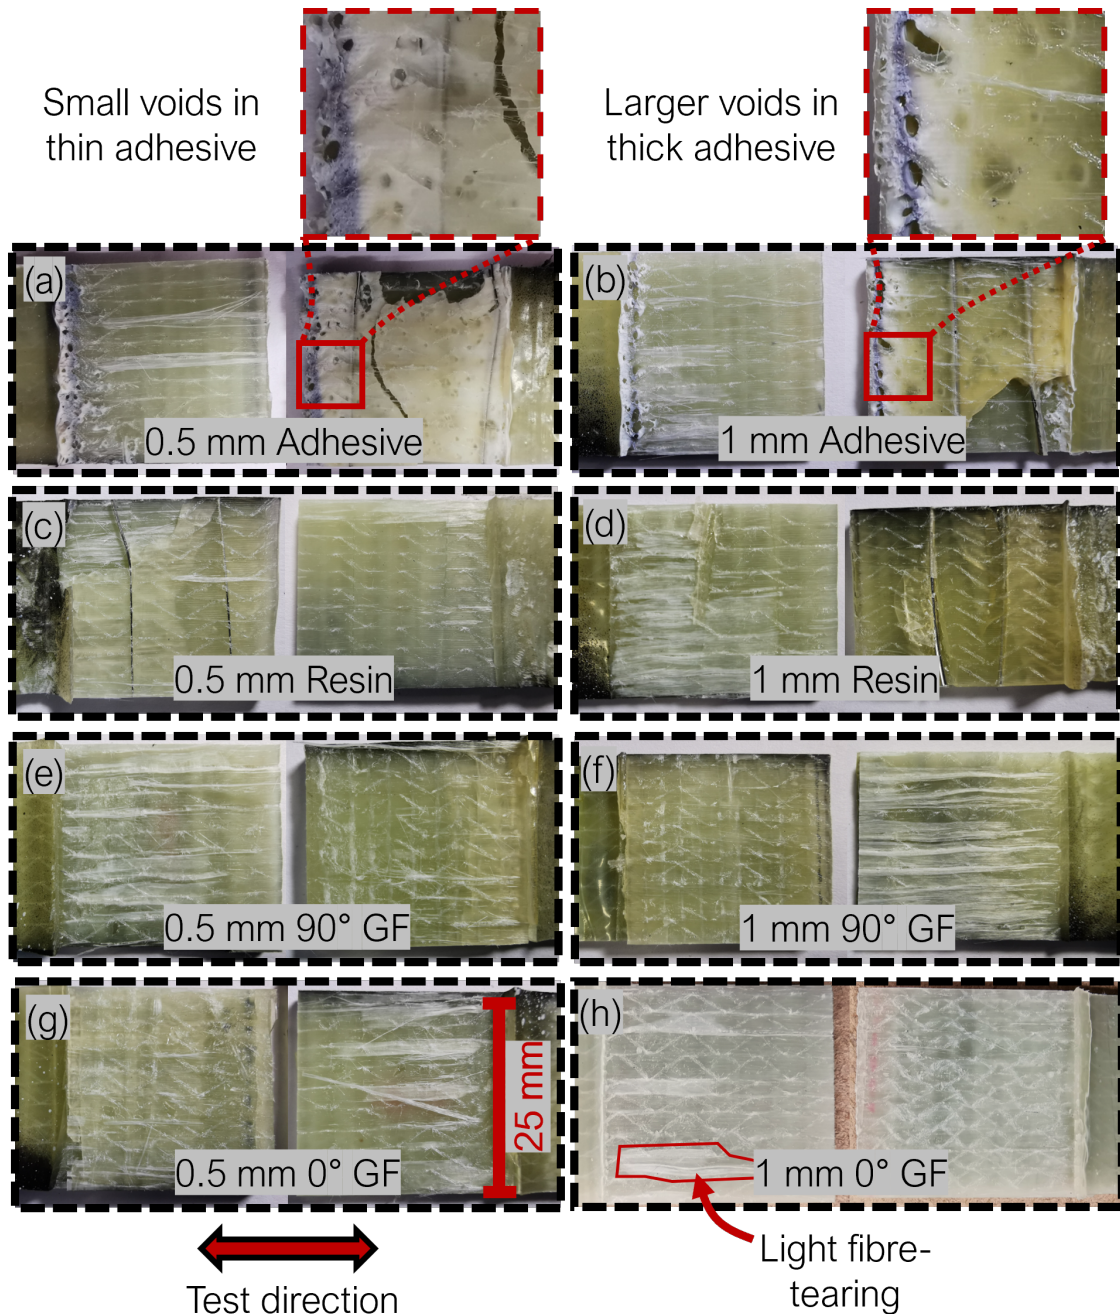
Representative fracture surfaces of the tested single lap coupons. Each image is of both halves of a fractured coupon. The crack propagation direction (the testing direction) is shown. Light fibre tearing is highlighted in the 1 mm 0° GF coupon (h), but it is visible in all fracture surfaces. The voids present in both adhesive bonds—(a) and (b)—are shown at higher magnification, and larger voids are visible in the 1 mm thick adhesive (b). Voids were not visible in the resin welded coupons—(c) and (d).
